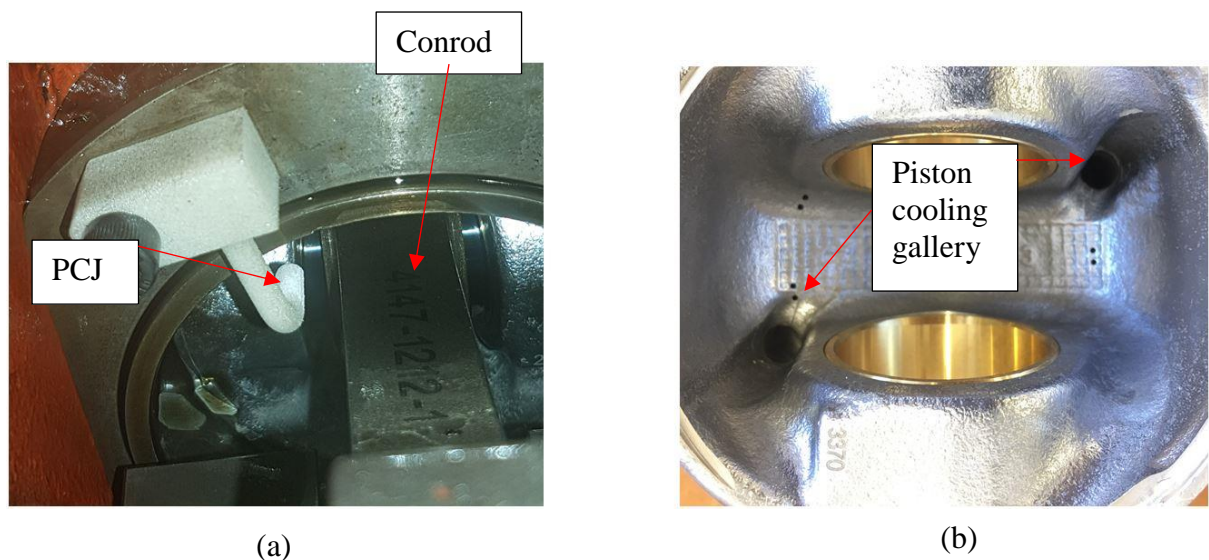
(a) Piston cooling jet installed on the engine. (b) Typical piston oil cooling galleries
